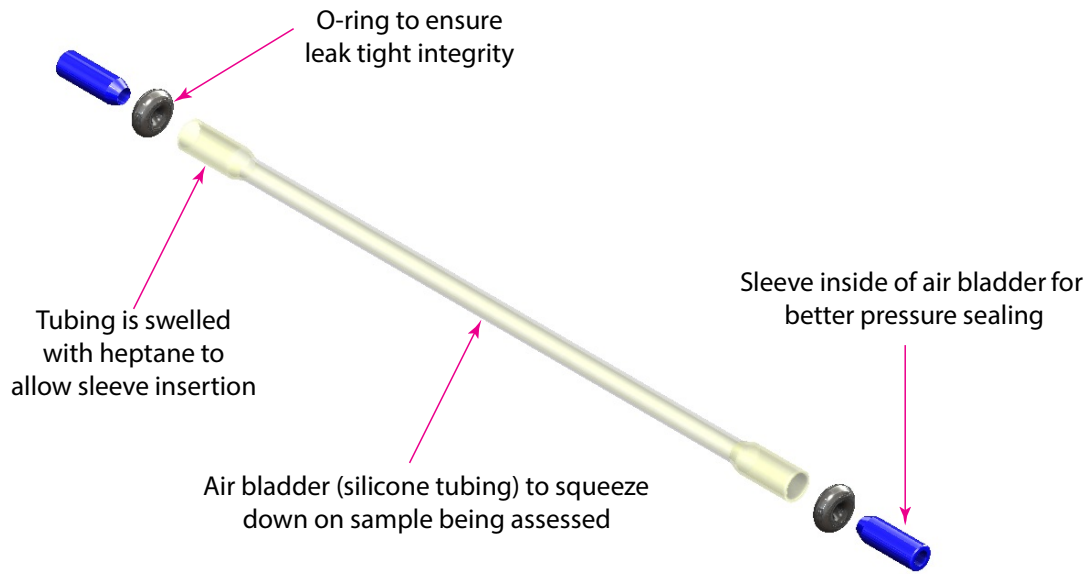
Air-bladder assembly designed to hold the sample under test – exploded and color enhanced
